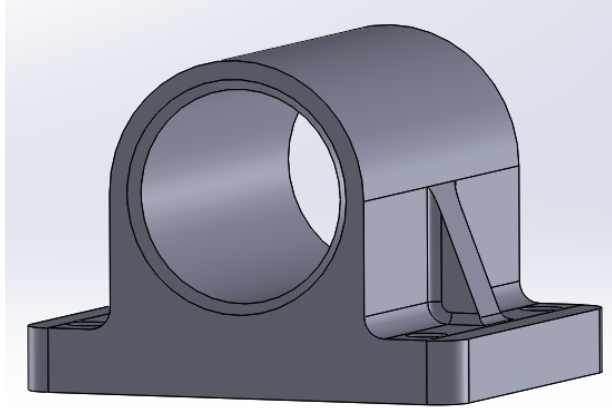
4 such parts will be required. One Al pipe will go through 2 such parts. 2 Al pipes are required to complete the base of the X-axis part.
